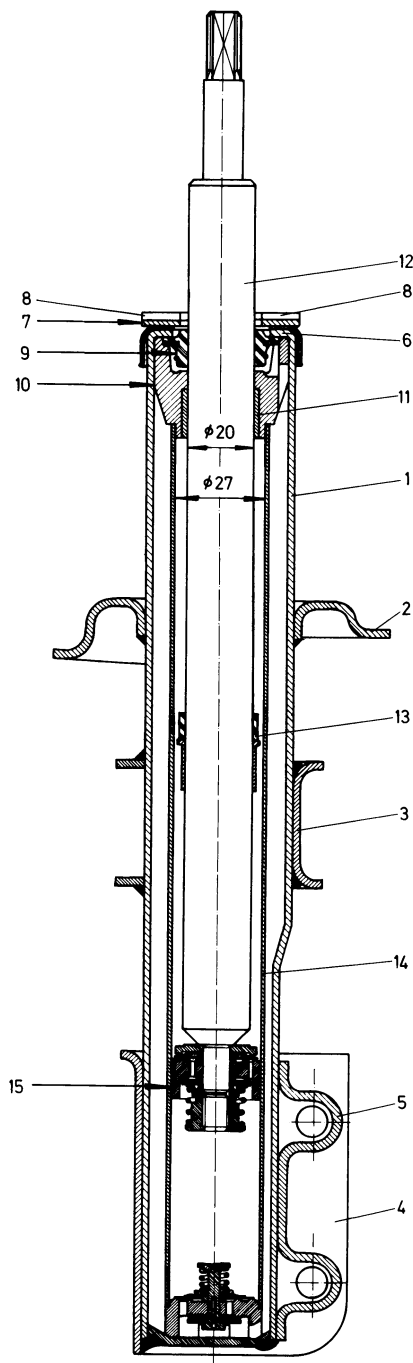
McPherson strut of the Fiat Panda (1995) manufactured by Monroe. The spring seat 2 for taking the coil spring, the tab 3 (for fixing the steering arm) and the bracket parts 4 and 5 to which the steering knuckles are bolted to the outer tube 1. The stop disc 7 is supported on the rolled edge 6 of the outer tube, and its two transverse grooves 8 ensure that the supplementary spring cannot create overpressure in the interior; this would press dirt and deposits into the seal 9. The bush 11 is pressed into the sintering iron rod guide 10 from the bottom and its surface conditioned to reduce friction (to the piston rod 12). The rod is 20 mm diameter and, in the mid-range, carries the jounce stop 13; when the wheel is fully extended, the minimum bearing span (centre bush 11 to centre piston) is 120 mm.
